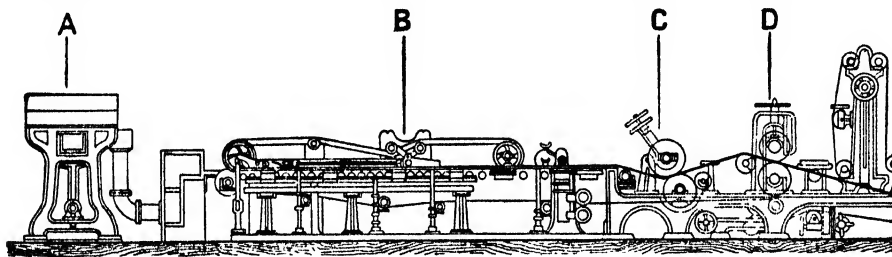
FOURDRINIER MACHINE IN SECTION.
